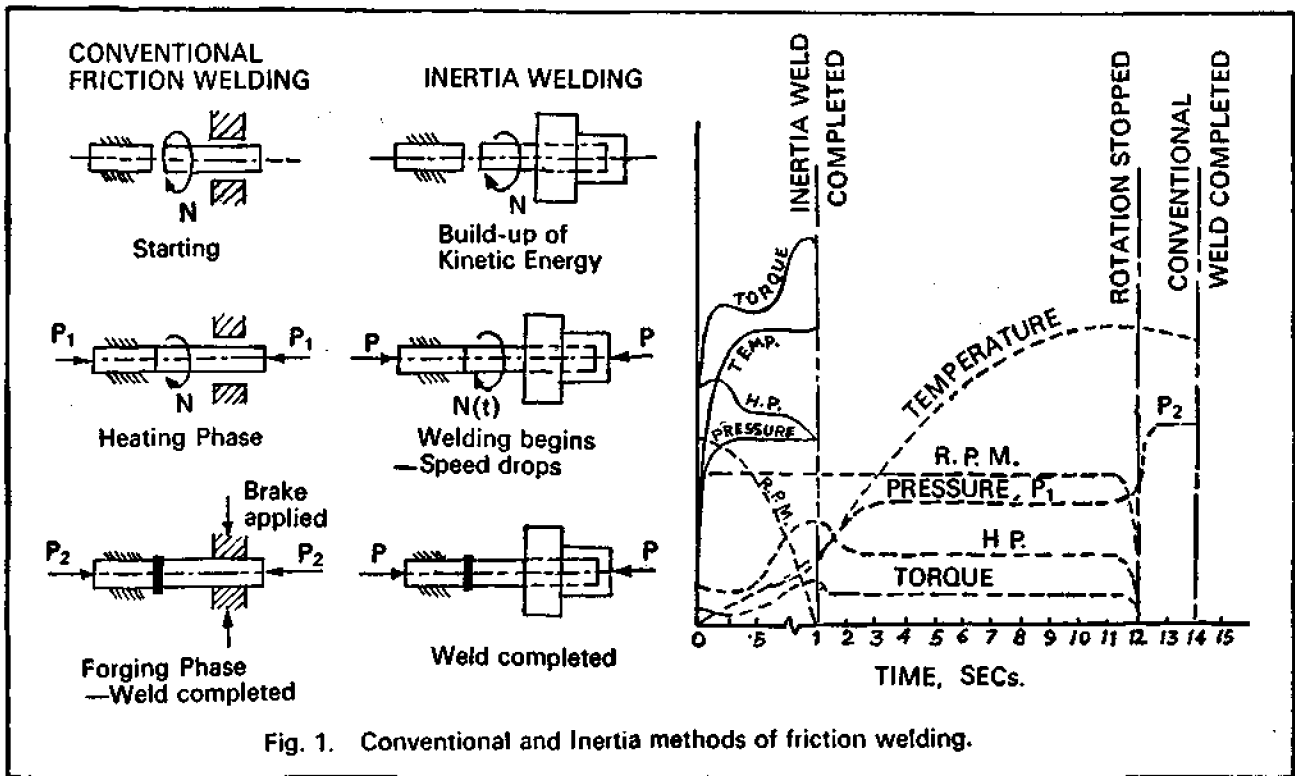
Conventional and Inertia methods of friction welding.
